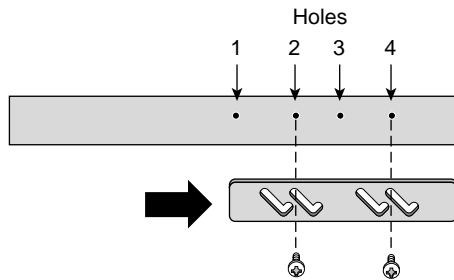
Holding Bracket Holes: Origin2000 Chassis
